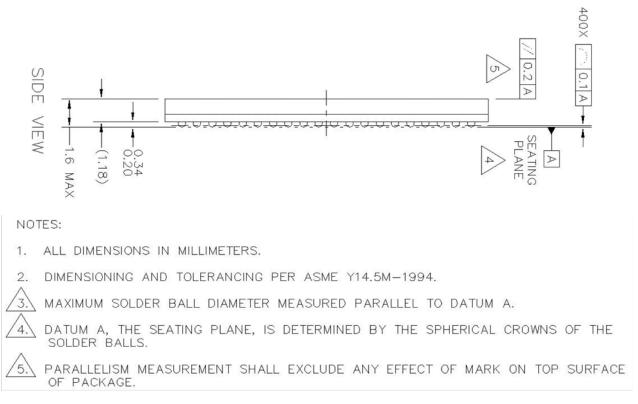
400 MAPBGA 17x17mm, Package Side View
